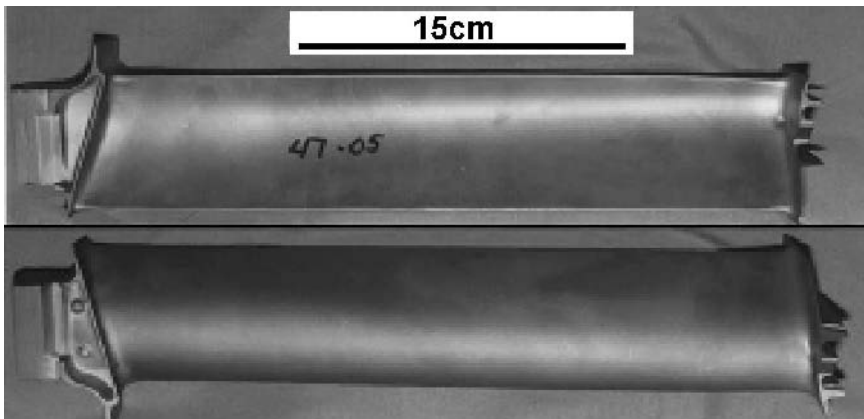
Low pressure turbine (LPT) γ blades in the as-cast condition ready for machining (courtesy GE Aircraft Engines)
